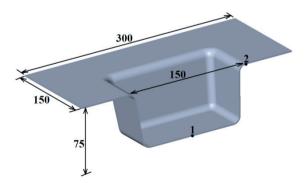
Dimensions of half cylindrical thermoformed product in mm
